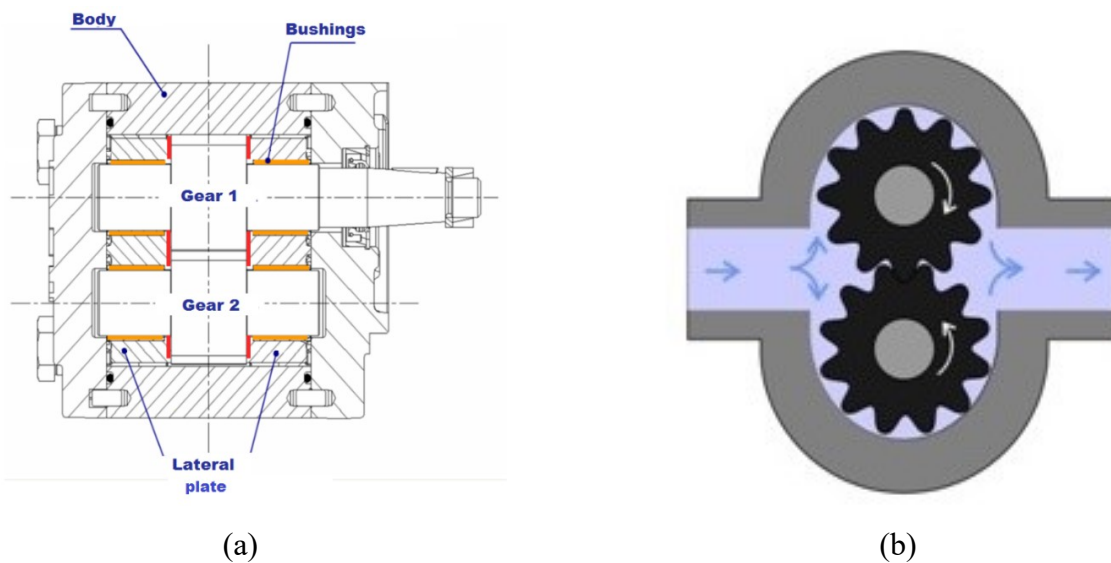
(a) Sectional view of an external gear pump. (b) Image of the working of an external gear pump.
